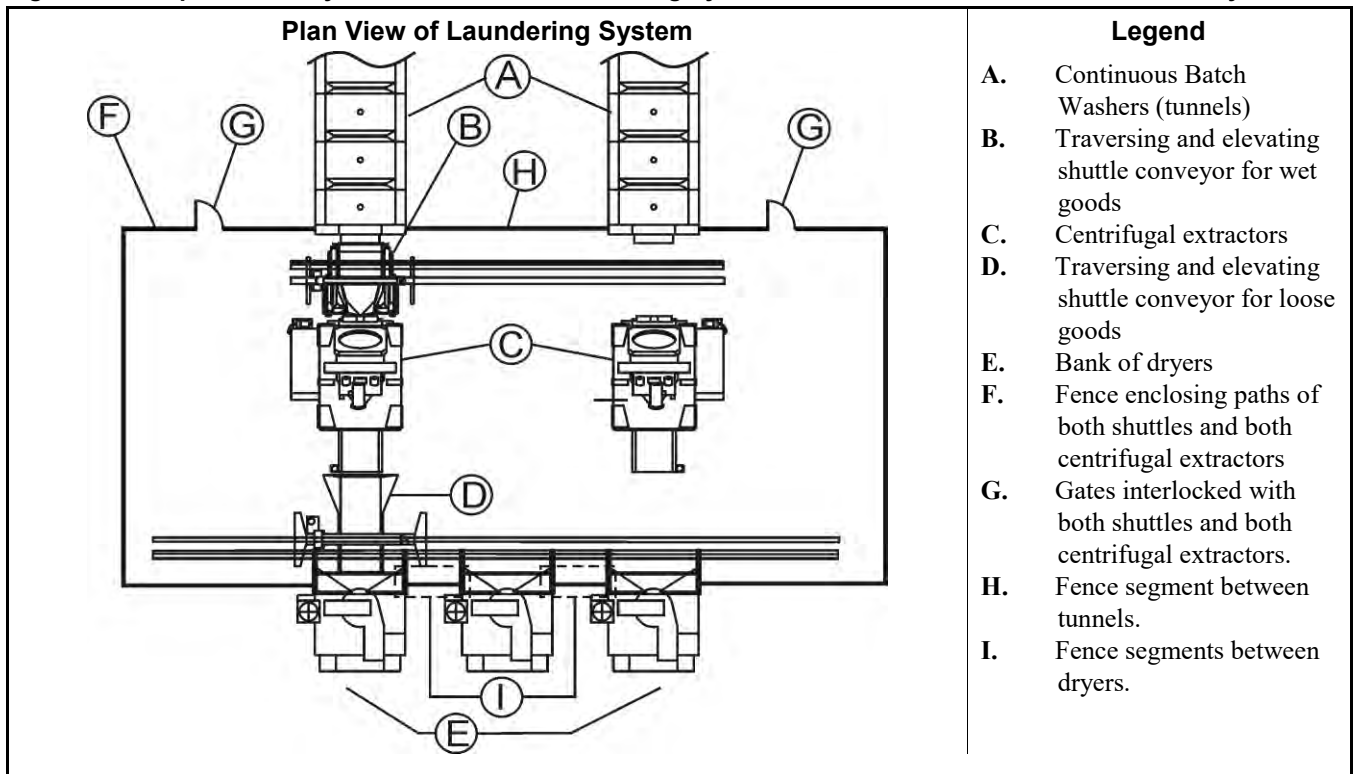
Example Fence Layout for Automated Laundering System Where Two Tunnels Serve a Bank of Dryers
